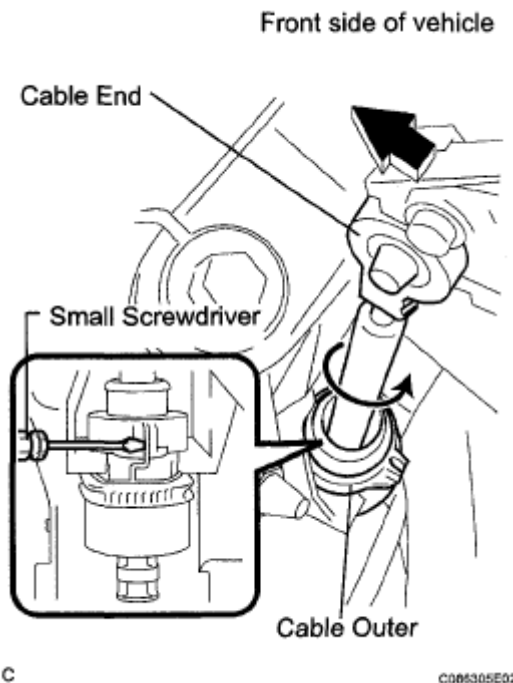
Disconnecting Cable Outer Of Transmission Control Cable Assembly
